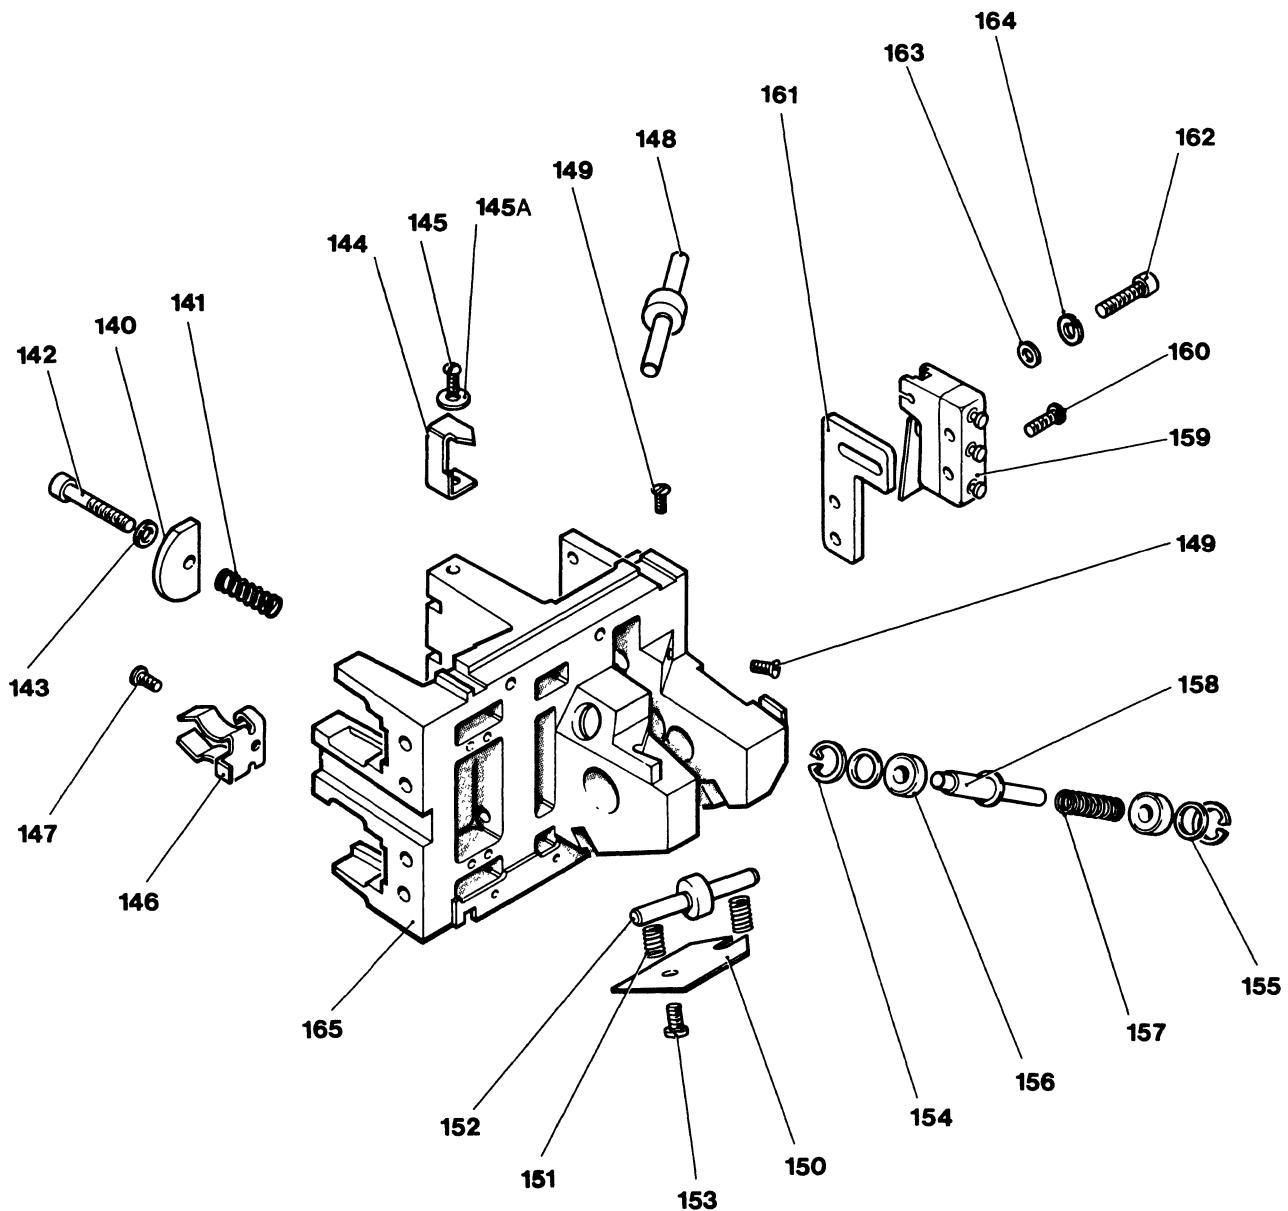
ACTUATOR ASSEMBLY (PART 4 OF 4)
